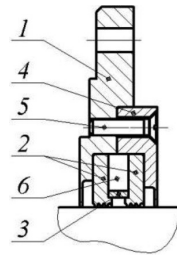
Magnetic fluid seal fan BИ-25: 1 – a non-magnetic body; 2 – a cover; 3 – bolt M6; 4 – pole tip; 5 – magnet Nd-Fe-B; 6 – the spacer ring
